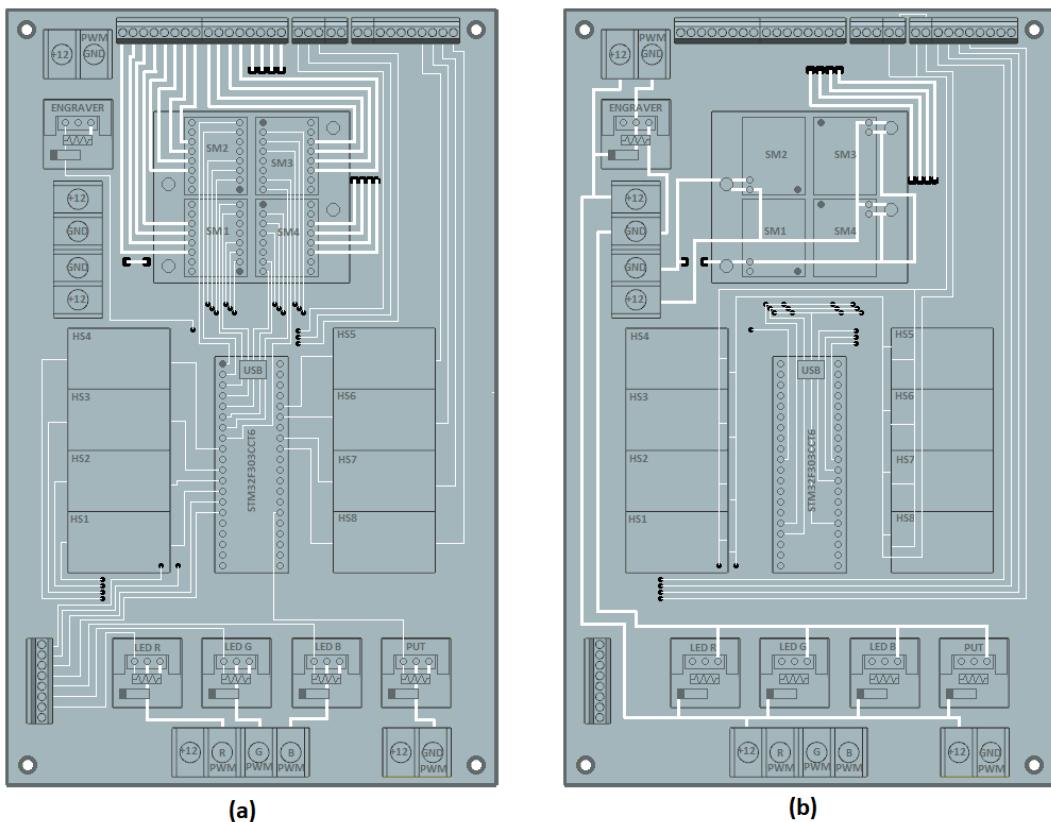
Schematic Diagram of the Two-Layer PCB Layout; (a) the Top and (b) the Bottom
